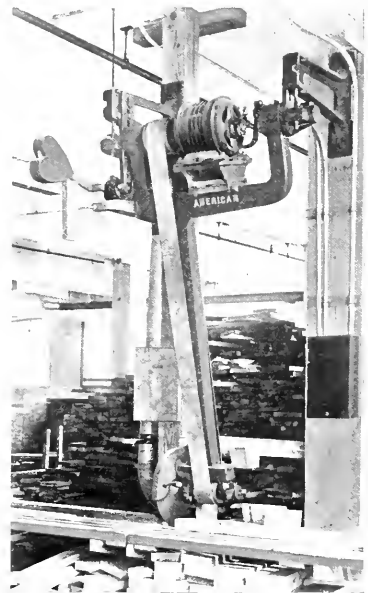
A CONVENIENT METHOD OF MOUNTING A MOTOR ON THE HEAD OF A SWING CUT-OFF SAW
